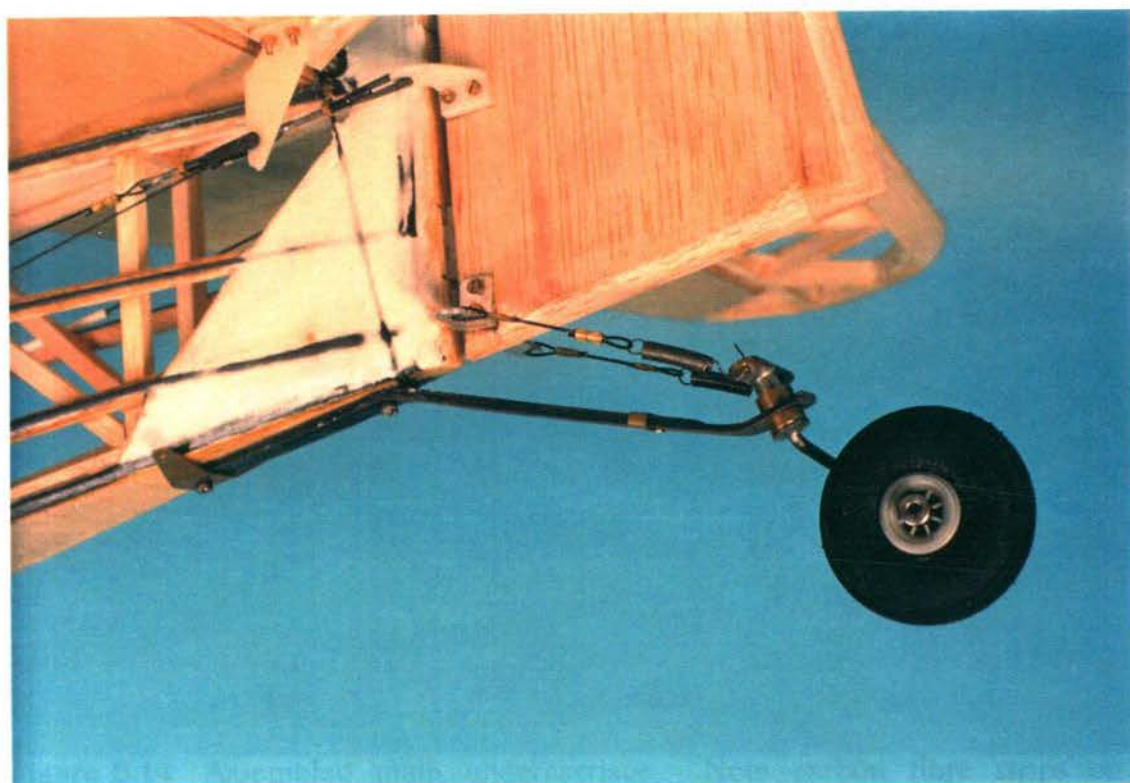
Tailwheel assembly. Note control cables, clevis and horns.
